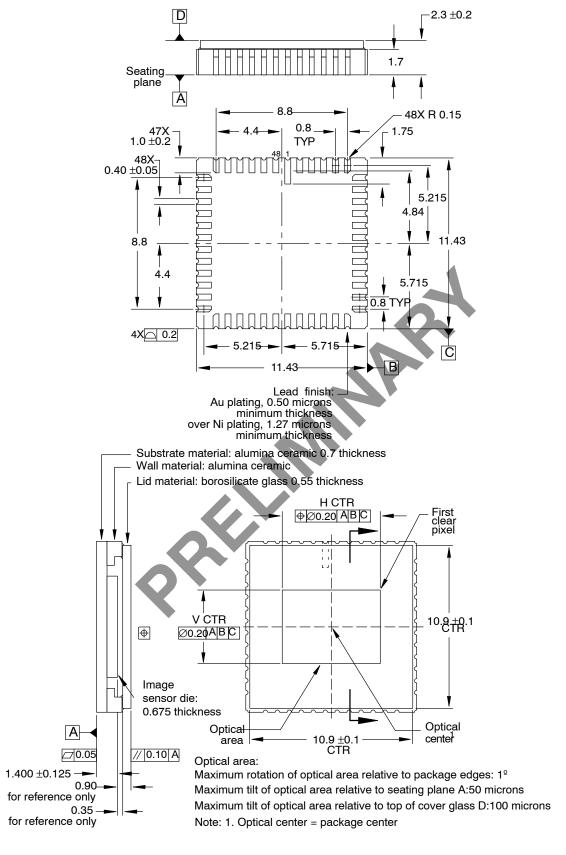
Package Mechanical Drawing (CASE 848AQ)
